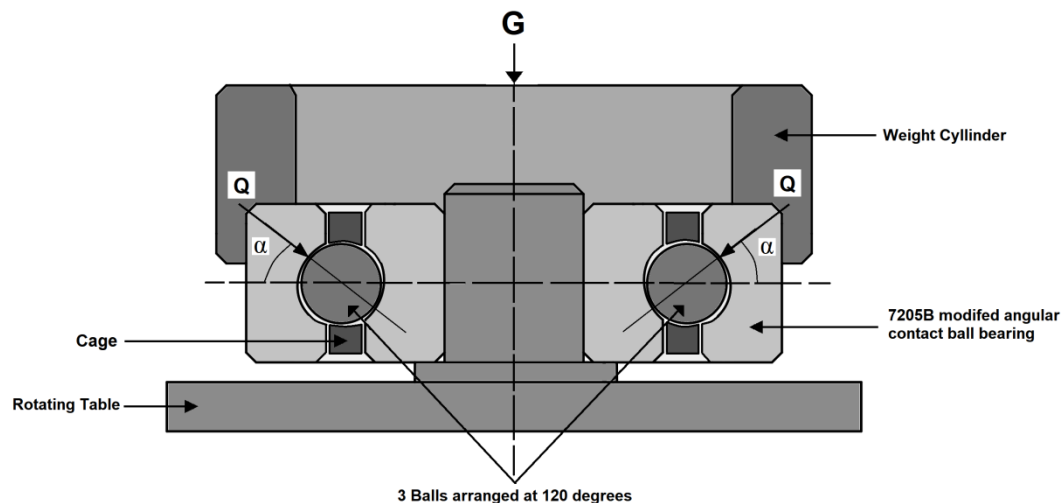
Modified 7205 B angular contact ball bearing with three balls and with cage.
